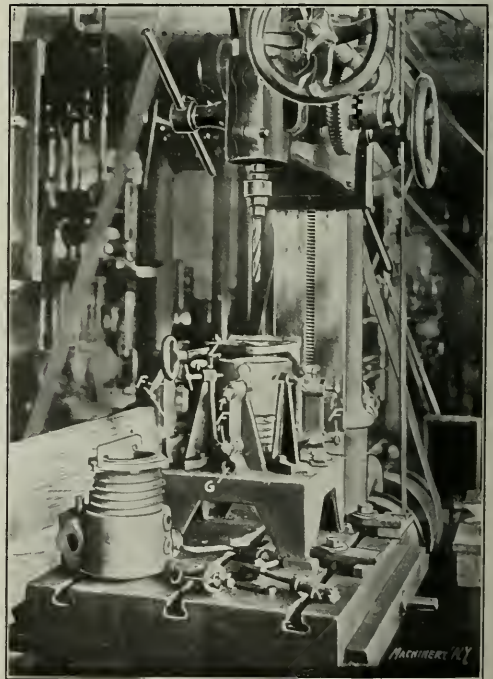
Laying Out Templet and Spotting Fixture for Cylinders.
